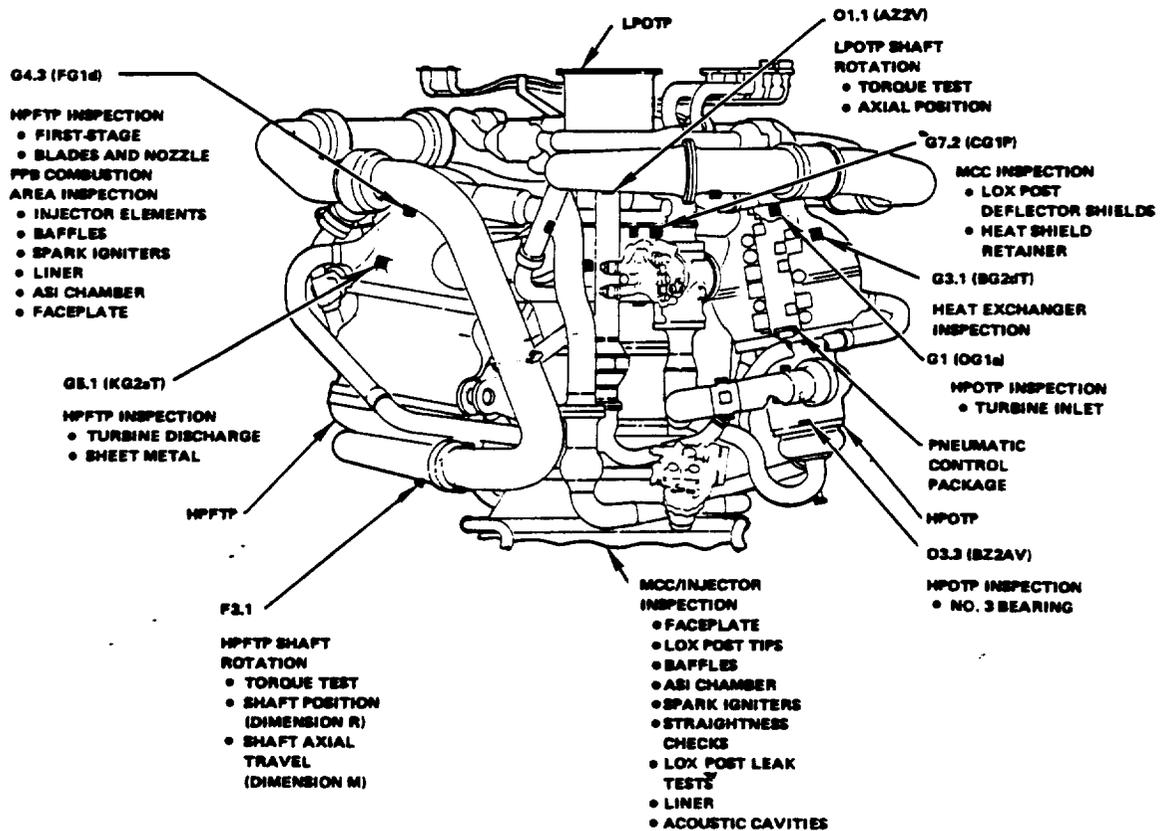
Internal Inspection and Shaft Rotation Access LPOTP Side of Engine.
